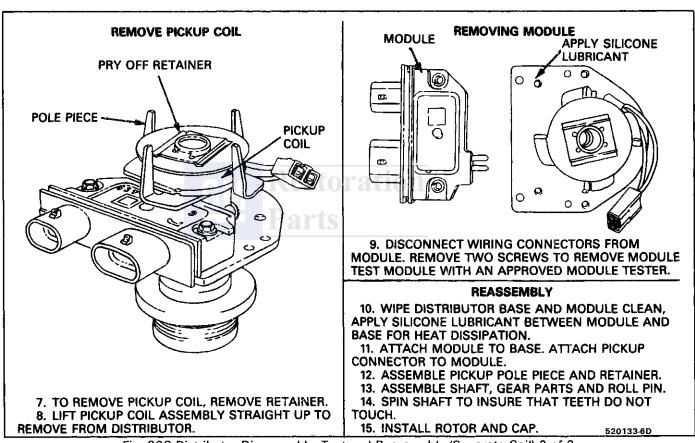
Distributor Disassembly, Test and Reassembly (Separate Coil) 2 of 2
